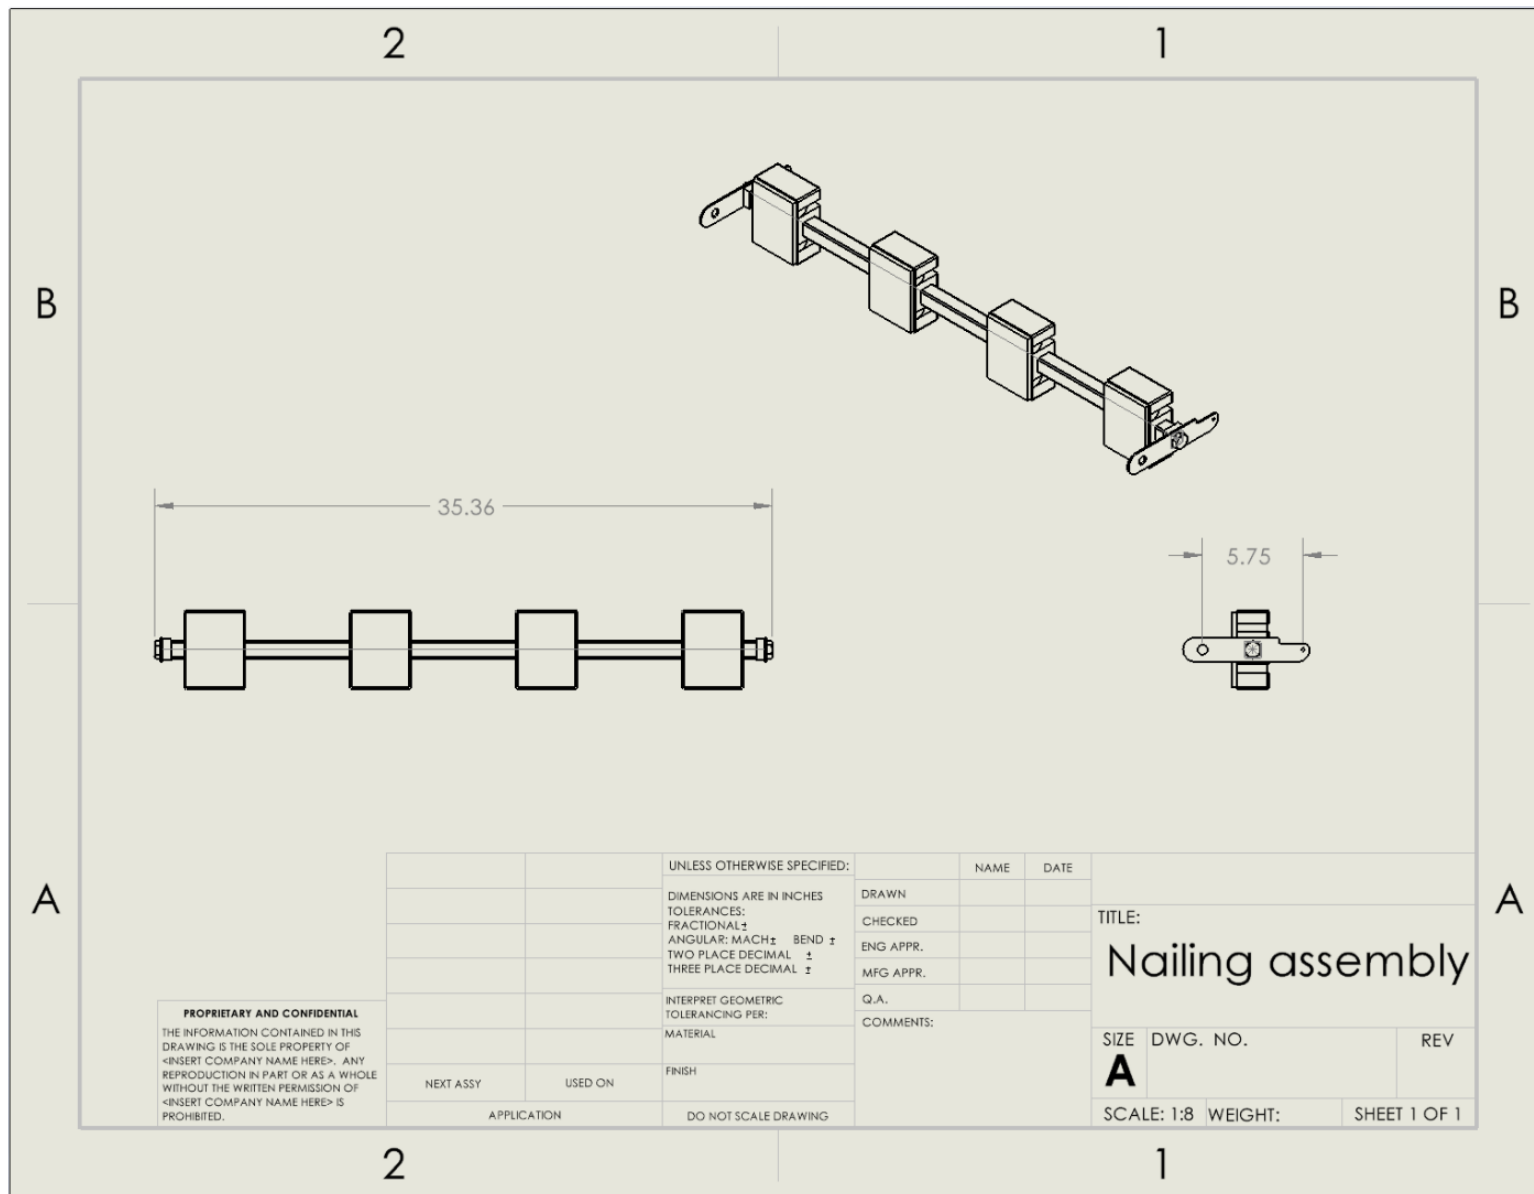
Final Nailing Assembly of Shingling Robot Module (Within Lower Module)
